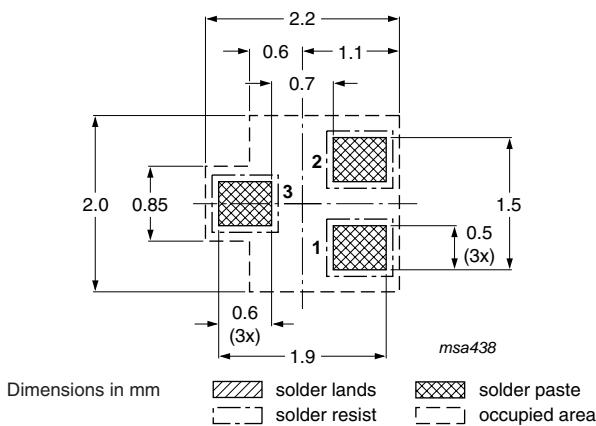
Reflow soldering footprint SOT416 (SC-75)
